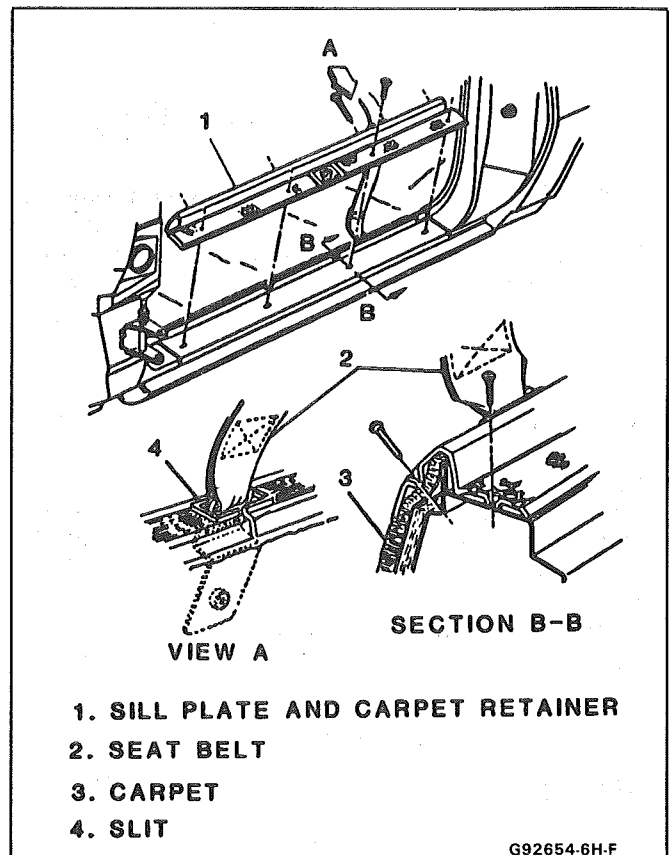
Sill Plate and Carpet Trim Finishing Panel
